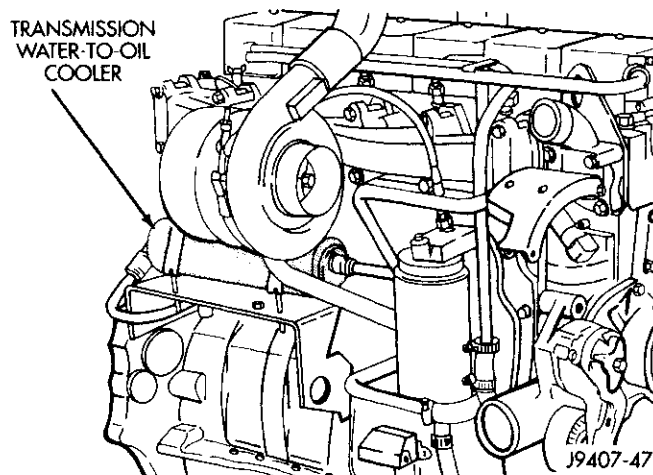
Transmission Water-To-Oil Cooler—Diesel Engine—Typical
